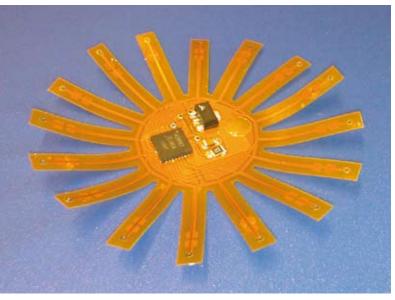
The complete electronic control system on a flexible PCB can be mounted inside the clamping structure.
